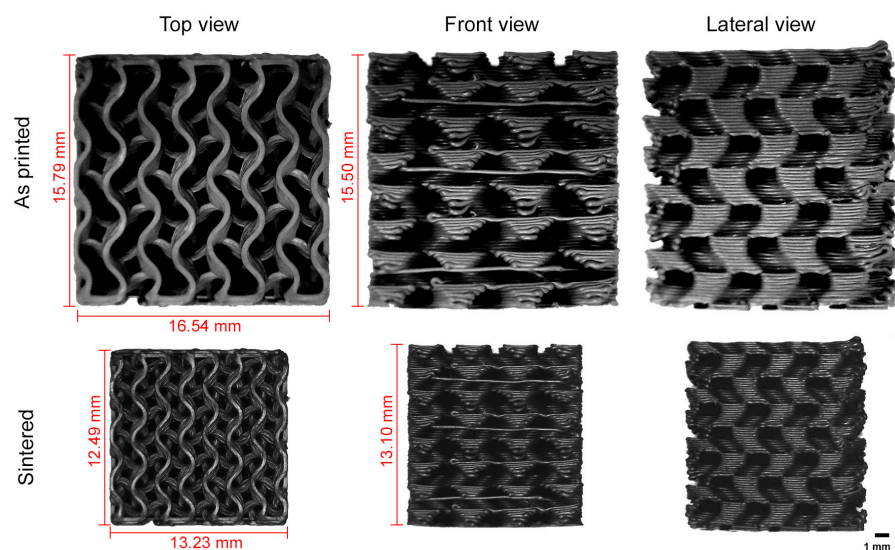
Representative top, front, and lateral views of the as-printed and sintered samples, showing maximum dimensions (in mm).
